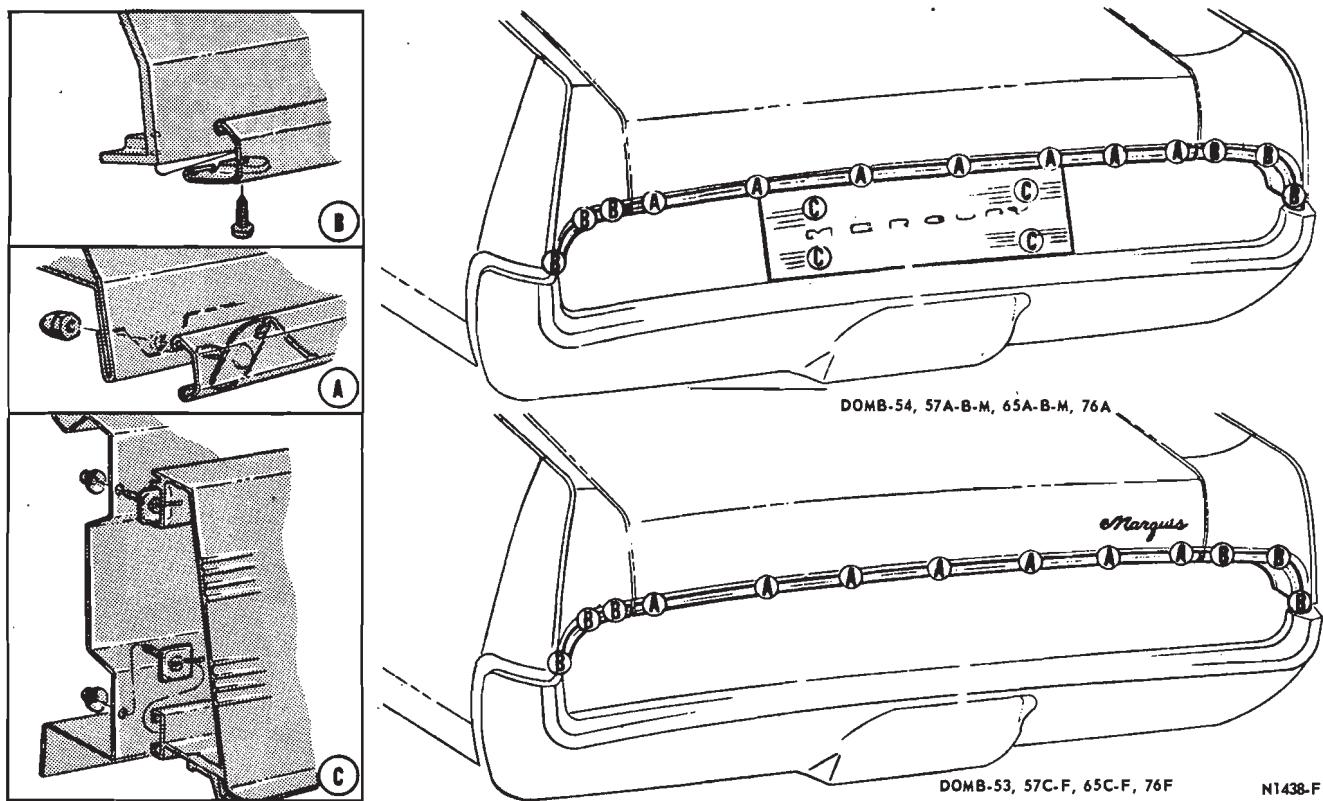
Mercury Exterior Side and Rear Moulding Installation
